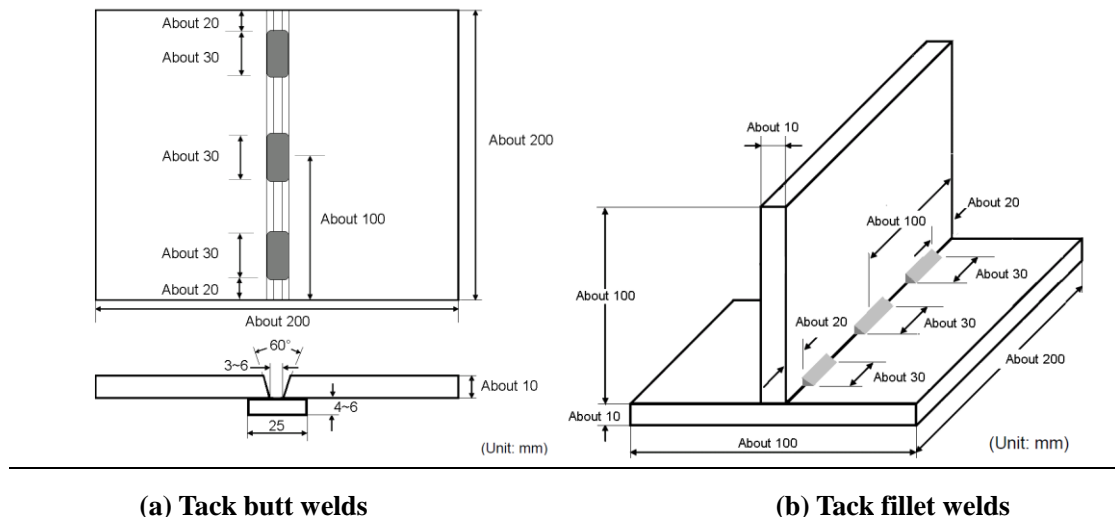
Dimensions of test assemblies for tack butt welds and tack fillet welds
